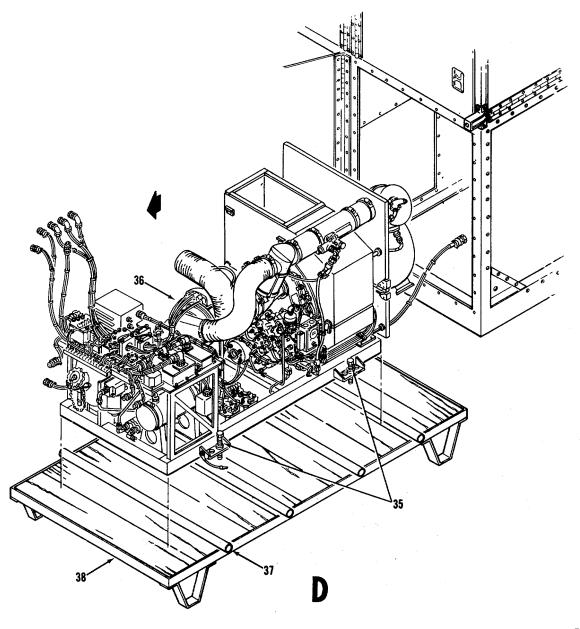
Removal of engine and skid assembly (sheet 2 of 3)
